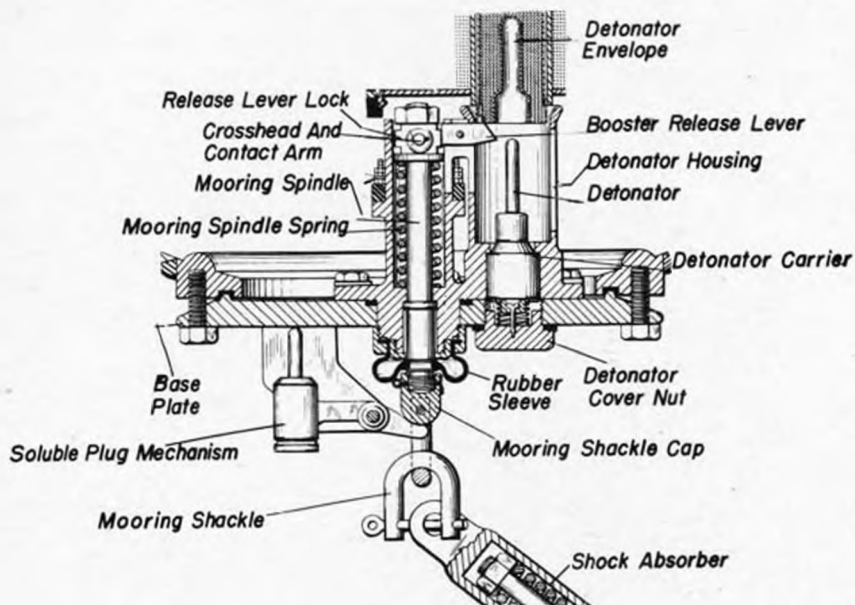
Mine Type JB, Straight - Shank Base Plate , Sectional View
